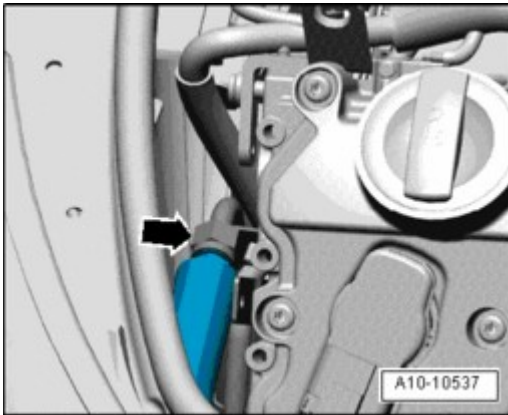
Disconnecting Power Steering Hydraulic Pressure Line At Left Front On Engine
